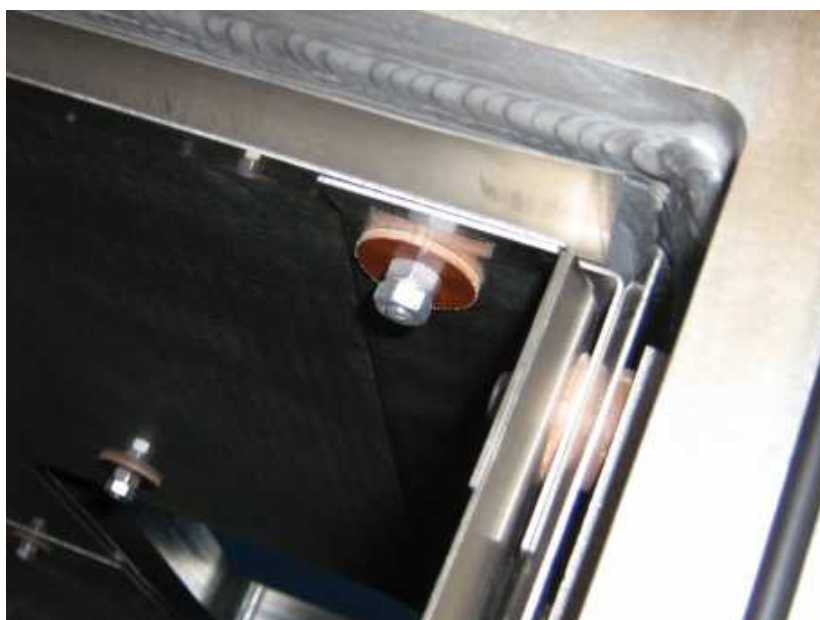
Aluminium frame attached to the inside of the vacuum vessel during the early stages of assembly of the shielding. A single mu-metal panel is shown in place. The feed throughs in the vacuum vessel wall are for the detector array cable harnesses.
